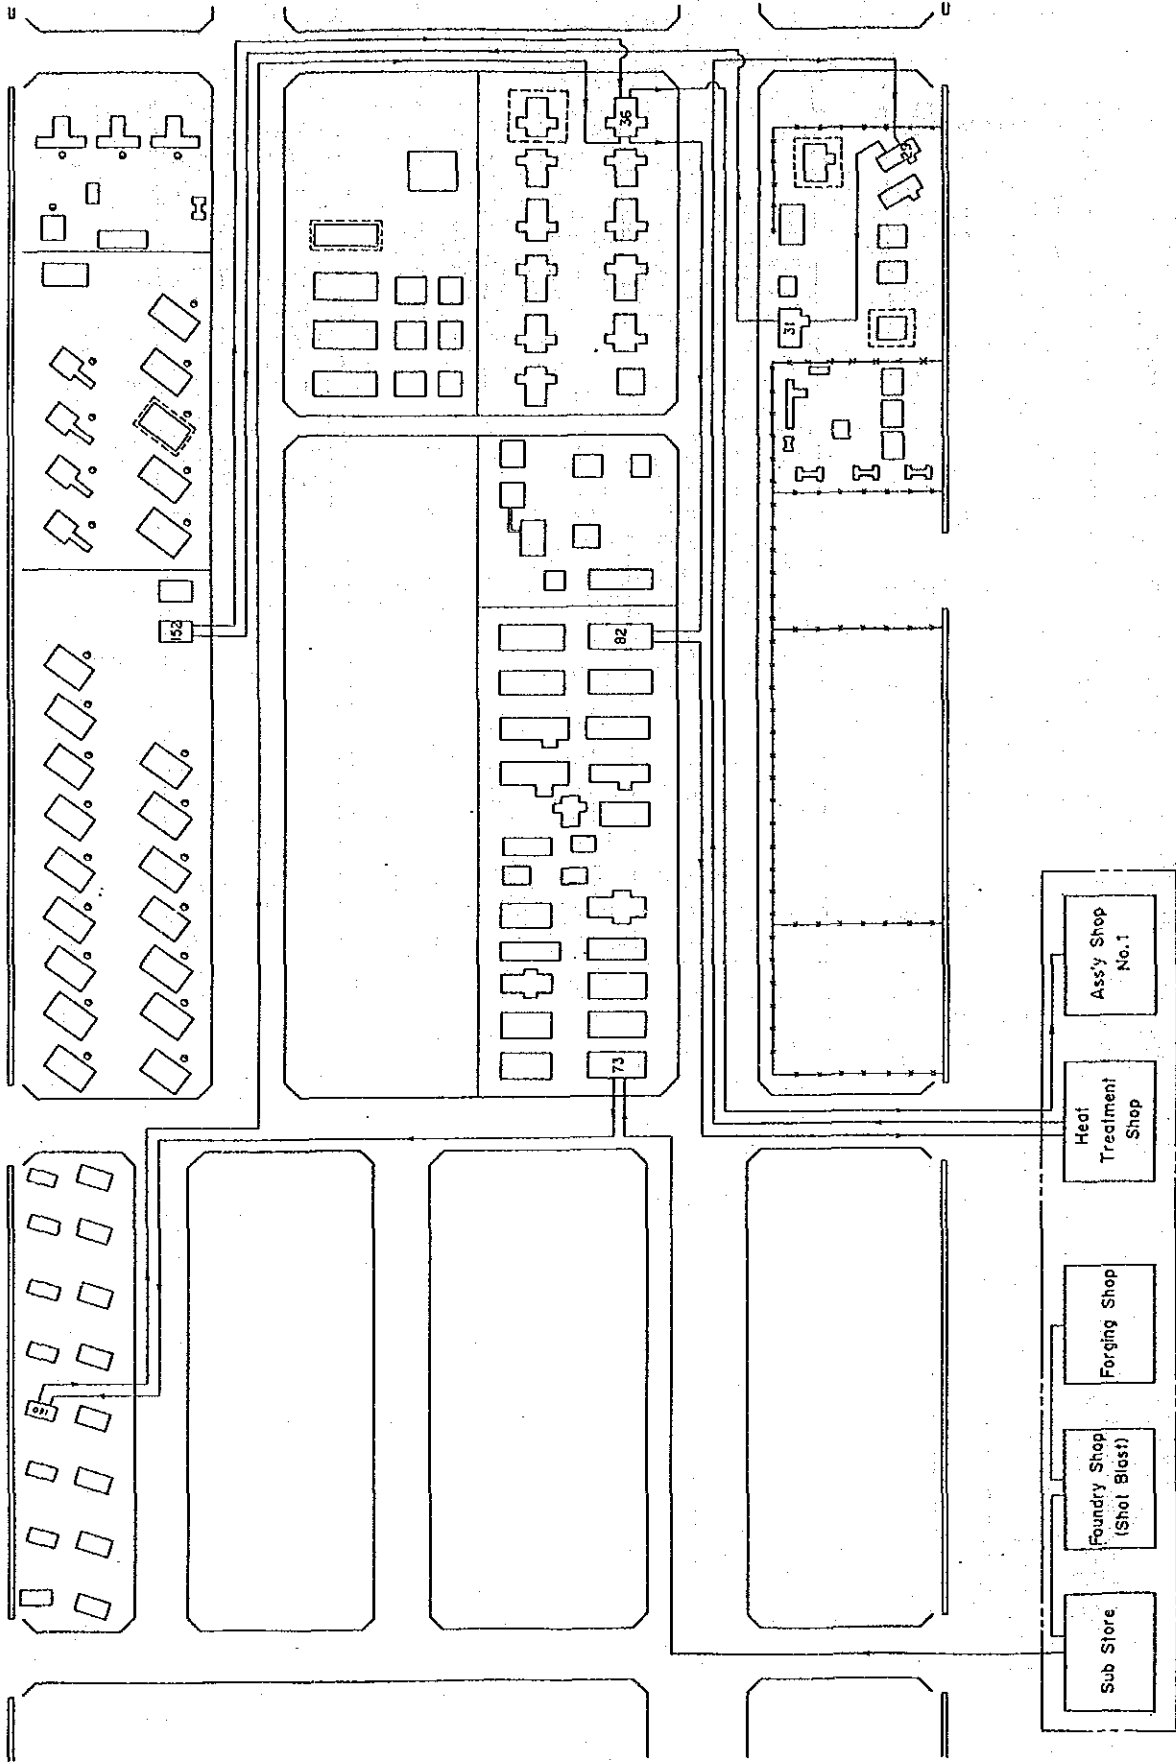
DIESEL ENGINE KND 5B SHAFT FOR IDLE GEAR FLOW CHART, AME II, NO.3 HI
